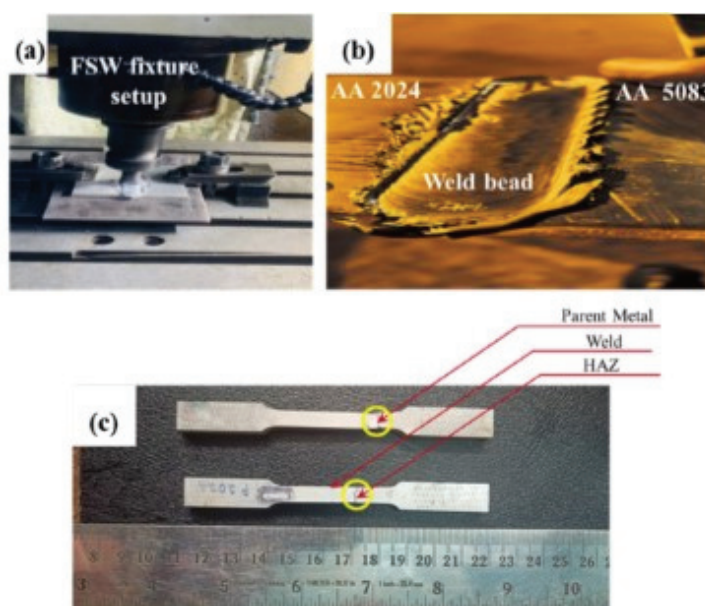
a) Friction stir joining processes; b) FSW plate; c) fractured specimens.
